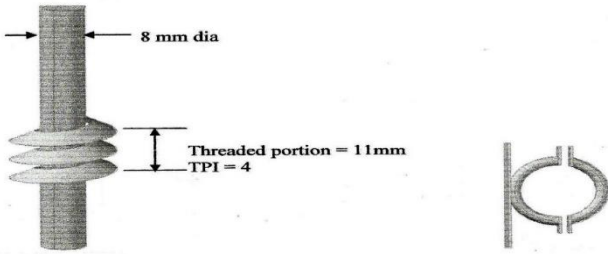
Schematic view of the worm and Schematic view of spray gun holder
